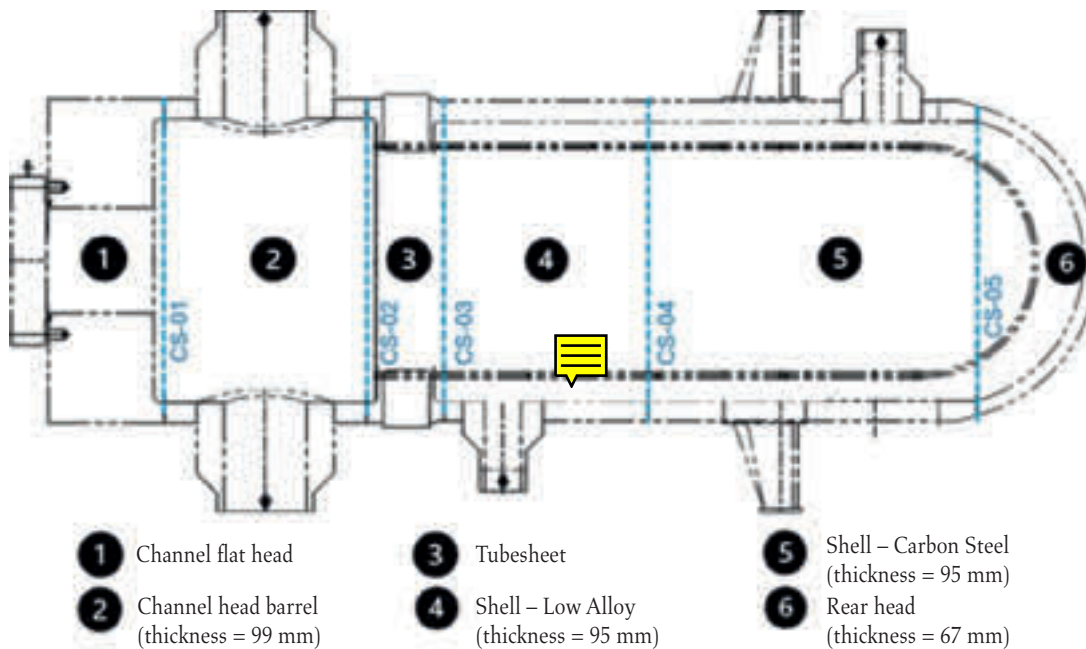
Components and circumferential weldments in E-02A/B/C.
